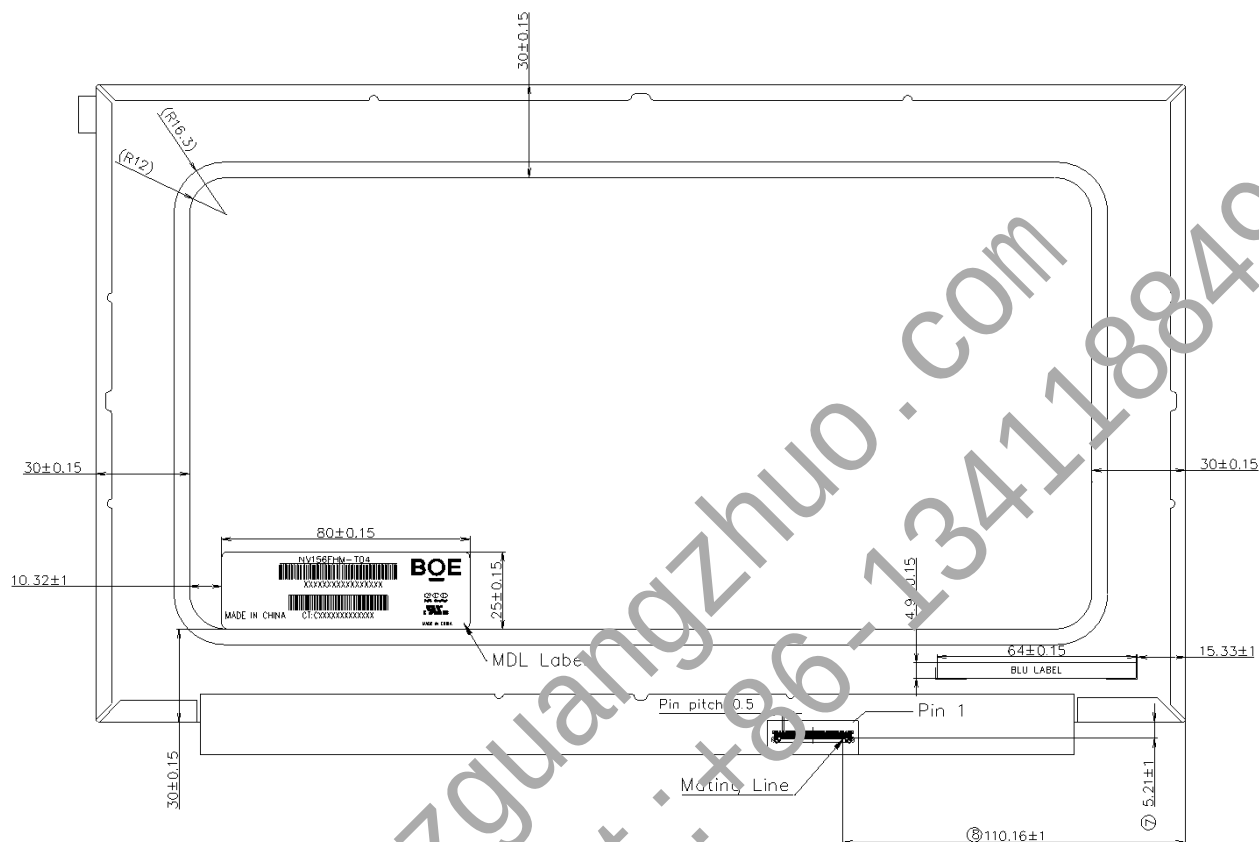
TFT-LCD Module Outline Dimensions (Rear view)
